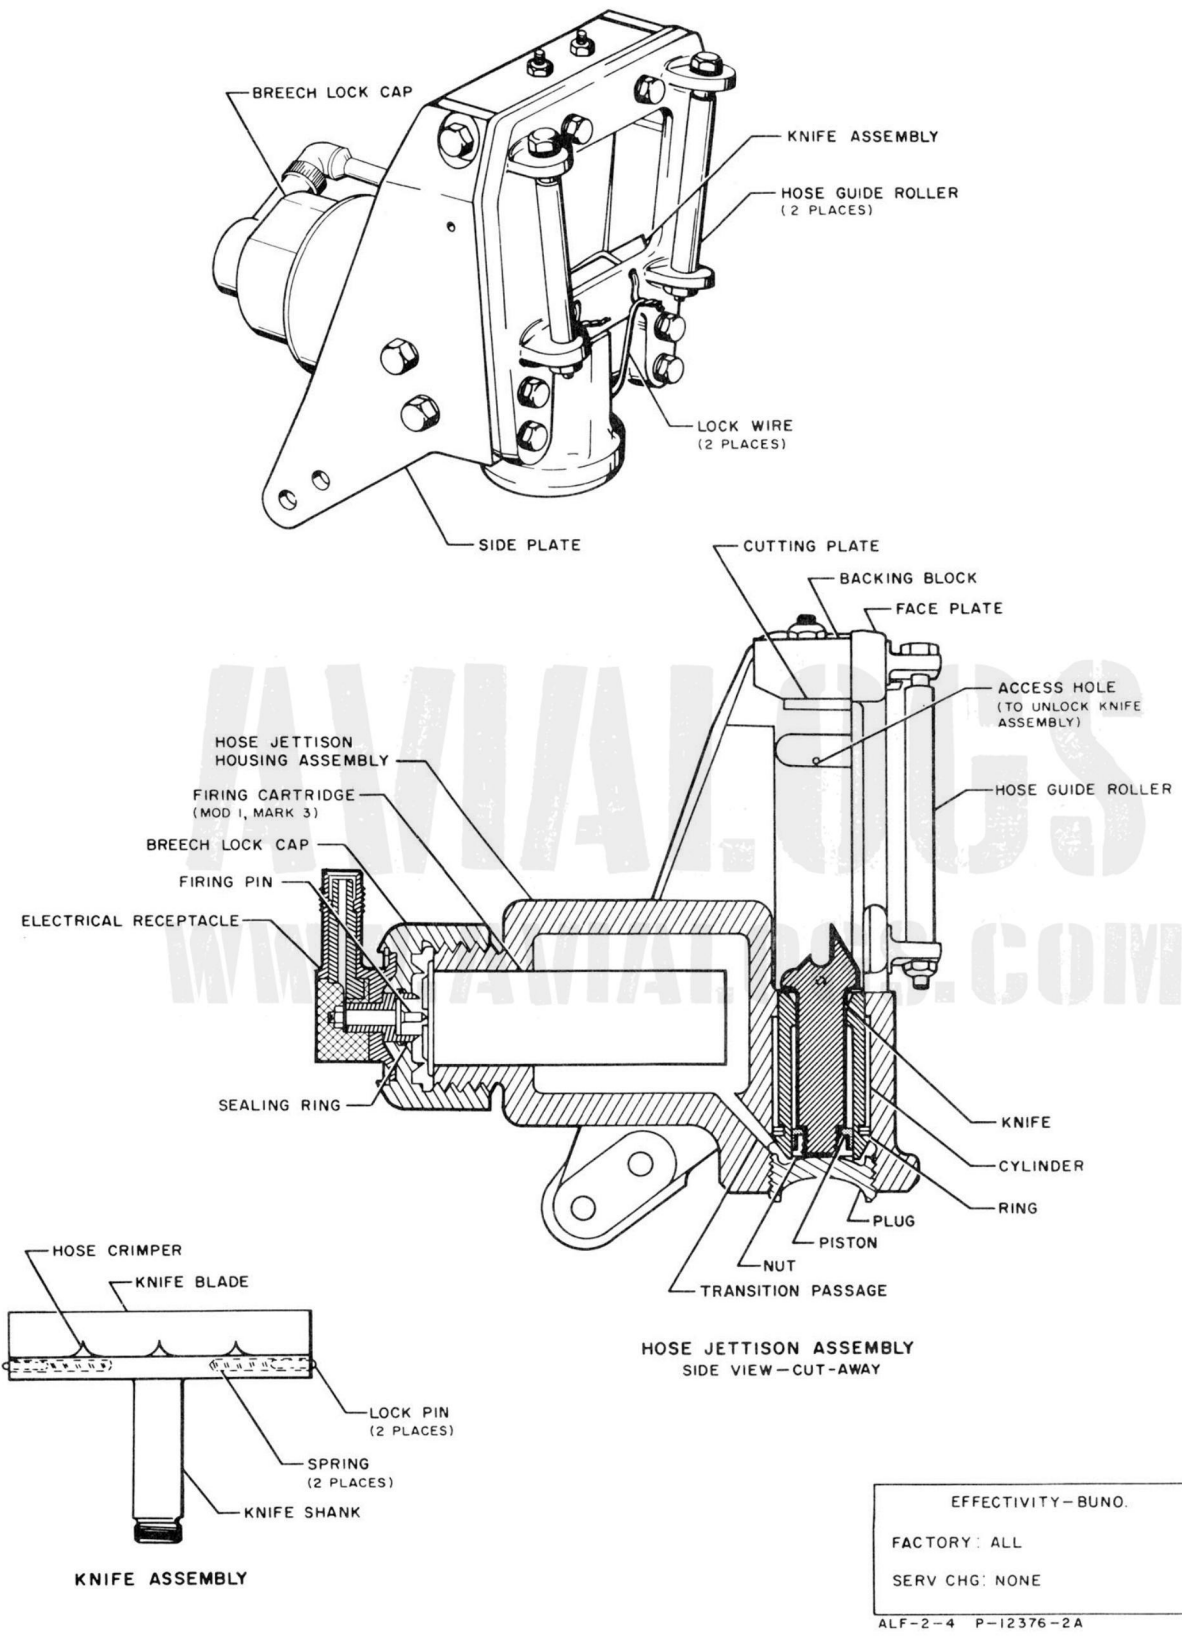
In-Flight Fueling Store Hose Cutter Assembly (Guillotine) (Sheet 2)
